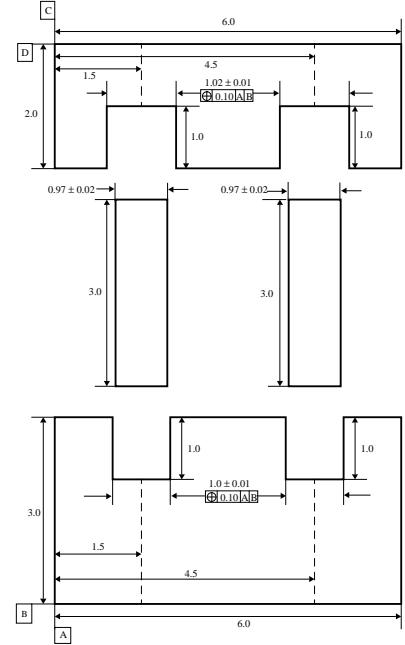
ANSI dimension and tolerance specification for the four part 2D example assembly: 1 Bottom (P1), 2 Shafts (P2 and P3), 1 COver (P4).
